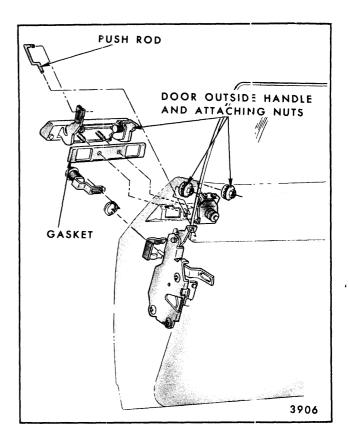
Door Outside Handle Removal (Lift Bar Type)
